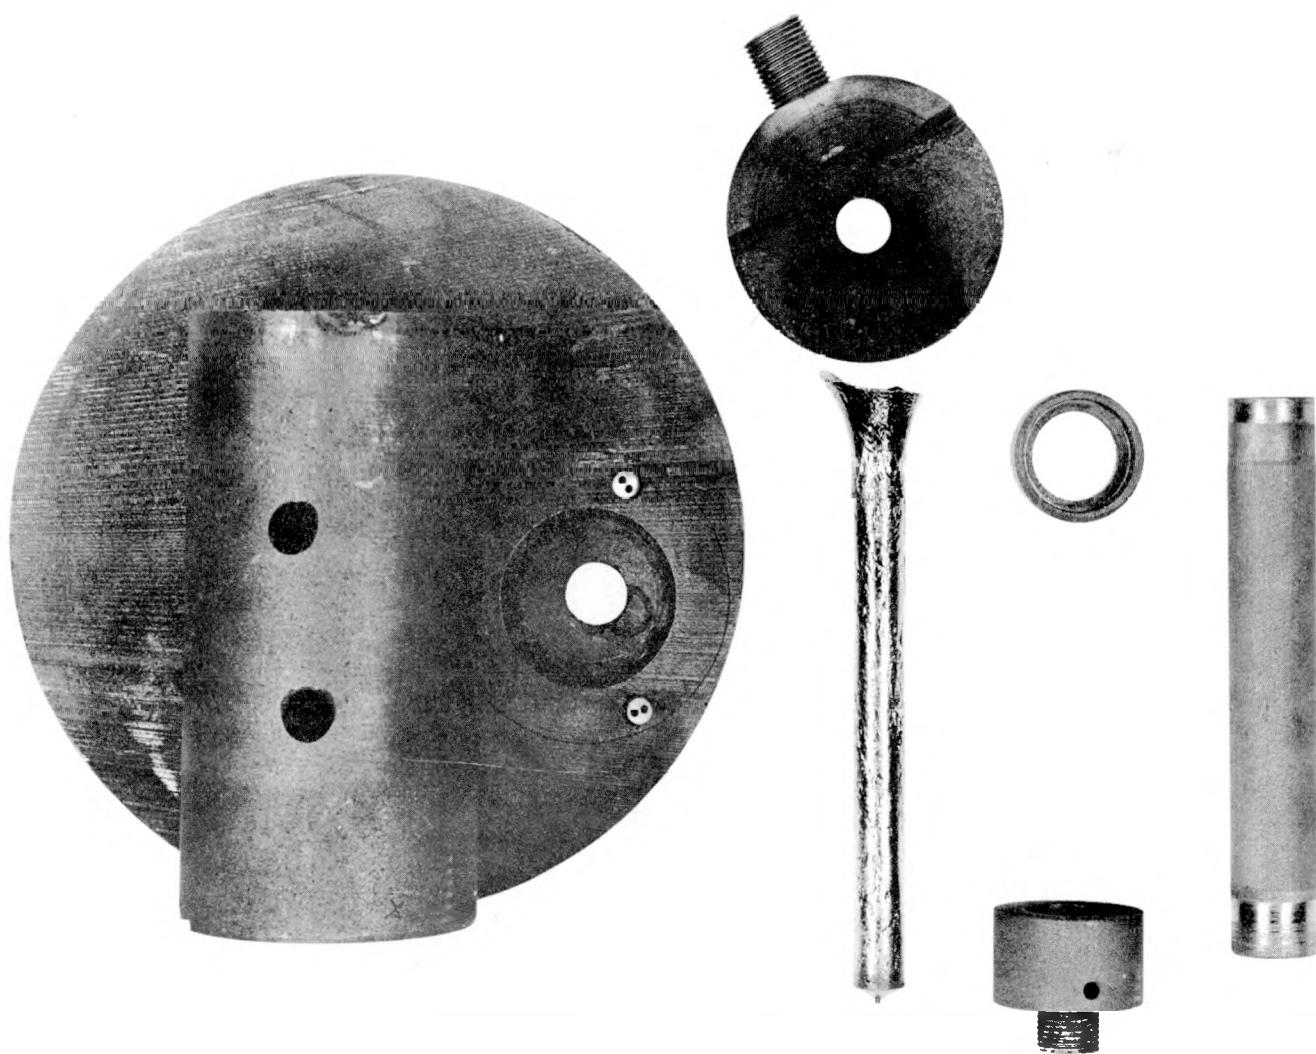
Lay-out of mold assembly showing a $5/8$ -in.
